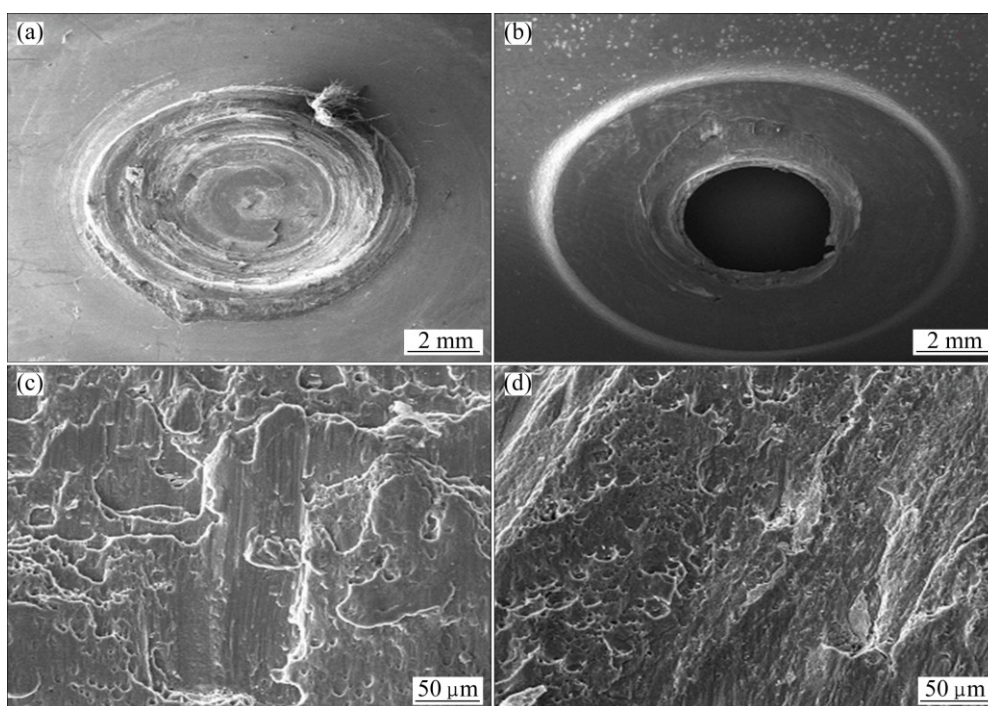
SEM images of spot weld produced using flat pin and flat shoulder tool with rotation speed of 800 r/min and shoulder plunge depth of 0.5 mm: (a) Failed nugget lower sheet (Cu); (b) Upper sheet (Al); (c, d) Fracture surfaces on copper and aluminium side, respectively
